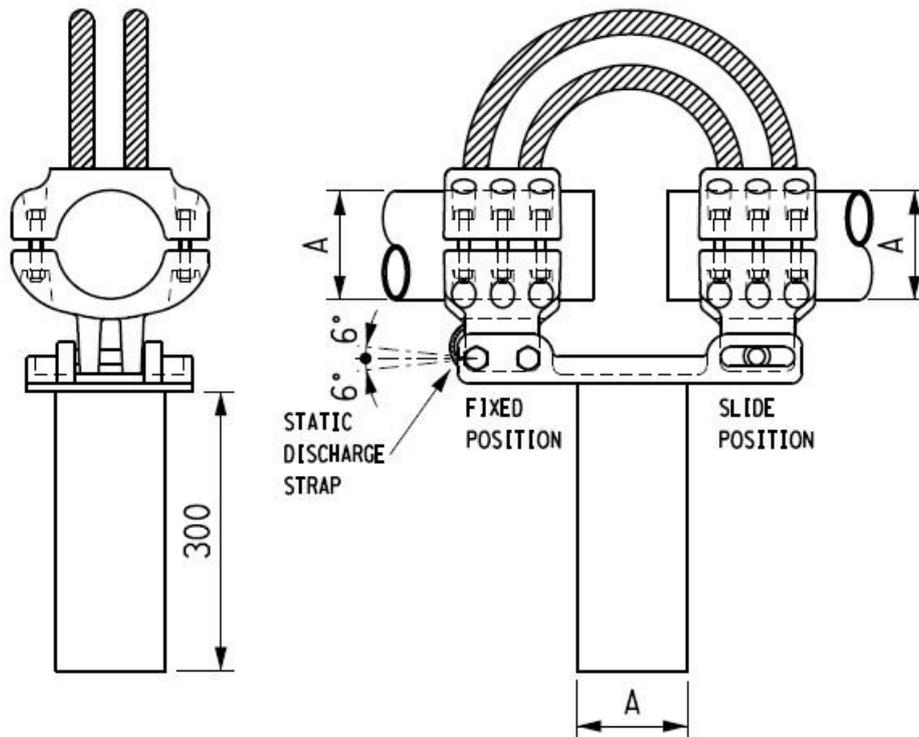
EEC-TB-FS: Expansion Clamp – Tube Mounted – Fixed/Slide
